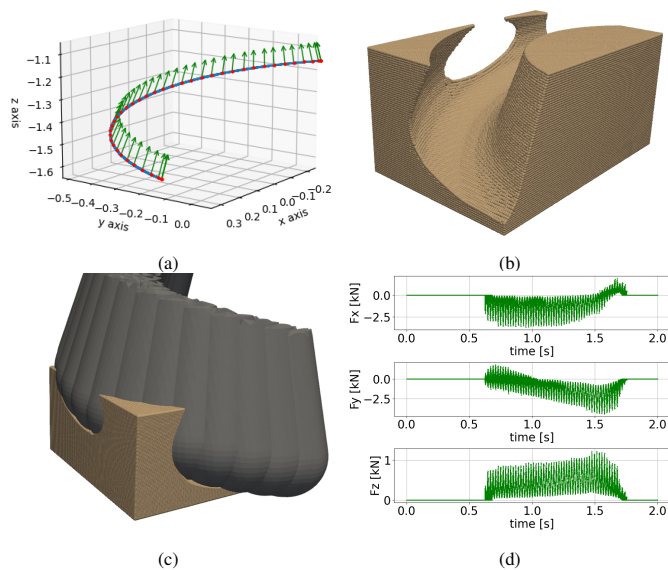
Illustration of a machining operation with a 5 axis tool motion and a ball-end mill. (a) Tool trajectory; (b) Resulting workpiece; (c) Resulting workpiece with tool envelope; (d) Cutting forces (F_x, F_y, F_z).
